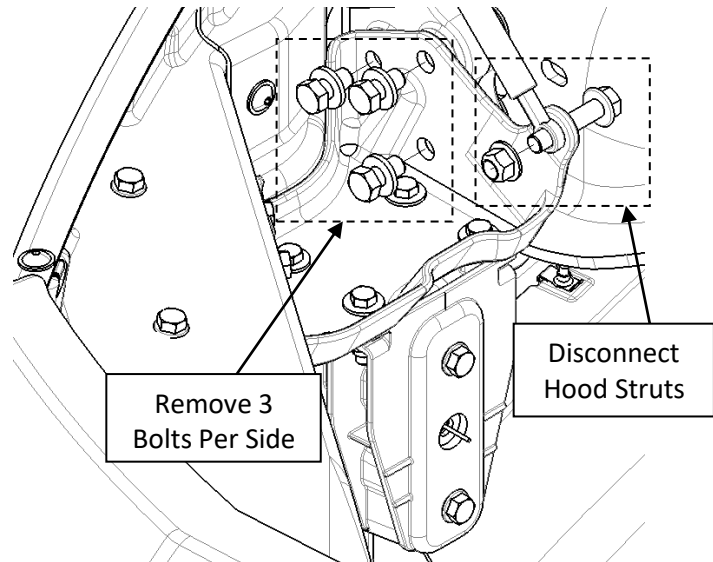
Factory Bumper Removal (Driver Side Shown)
